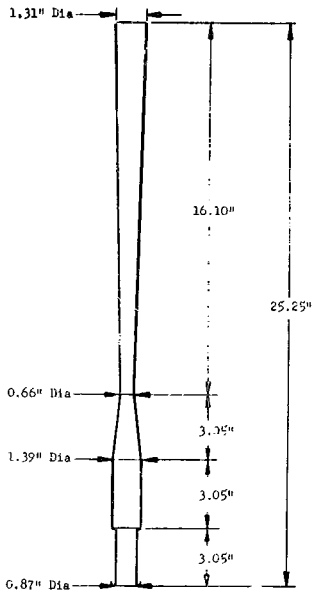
SKETCH SHOWING DIMENSIONS OF HS-1(.024) COMBUSTOR
